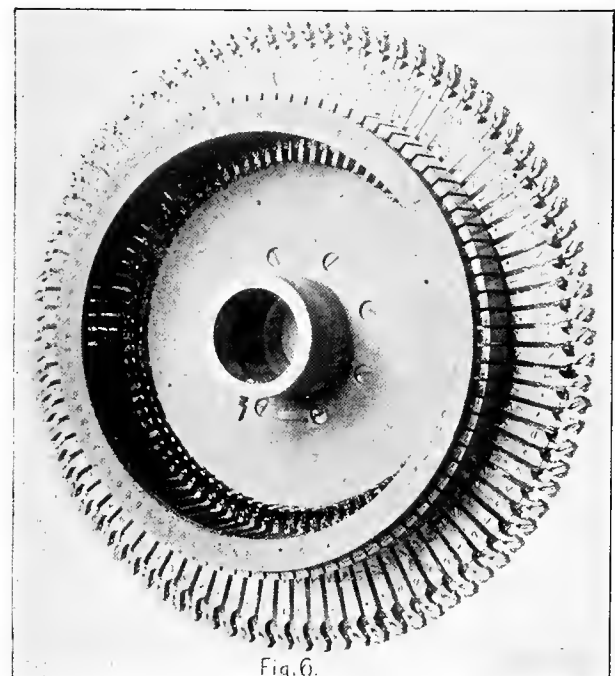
COMMUTATOR COMPLETE, READY FOR MOUNTING
